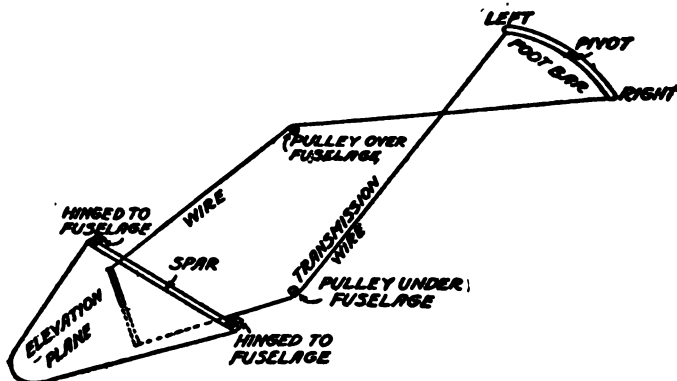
FOOT BAR CONTROL FOR ELEVATING PLANE
